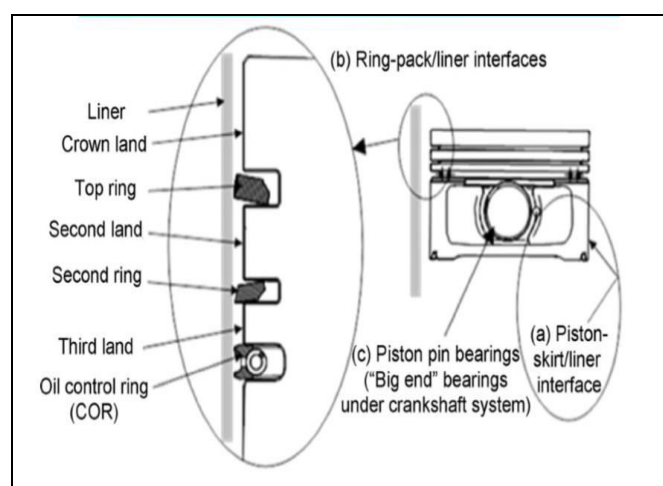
Piston Assembly System Showing (A) Piston-Skirt/Liner Subsystem, (B) Ring-Pack/Liner Subsystem, And (C) Piston-Pin/Piston Bearing Surfaces. Con-Rod "Big End" bearings under crankshaft Section.
